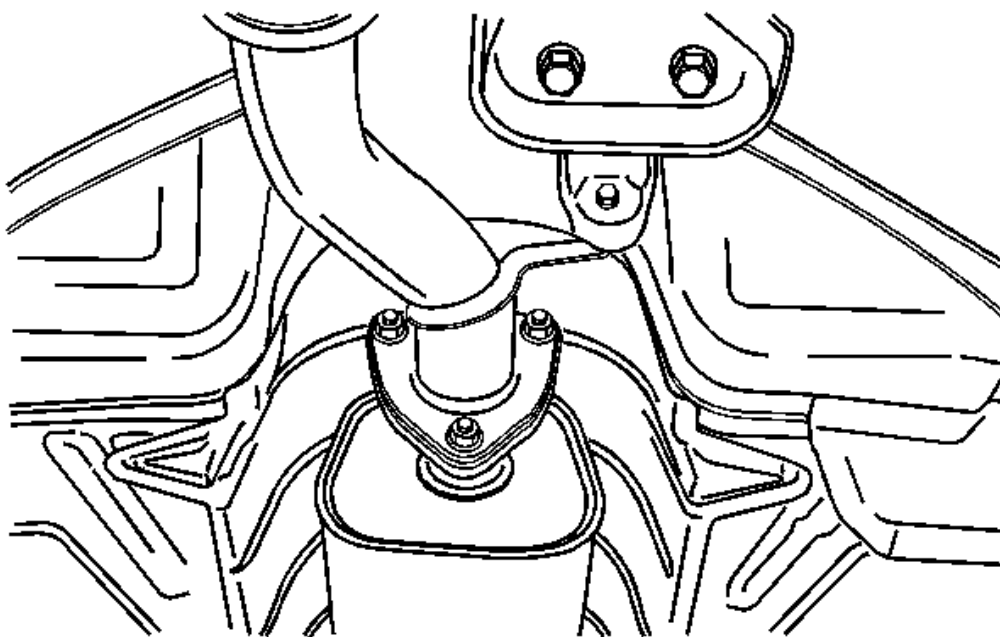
View Of Front Exhaust Pipe, 3rd Muffler And Nuts
